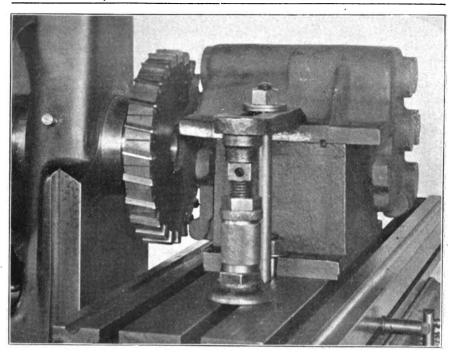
INSERTED TOOTH CUTTER ON THE MAIN SPINDLE.
